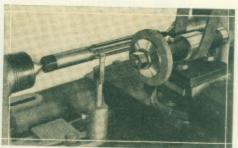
Grinding a Straight Reamer. Taper Reamers Can Also Be Ground
